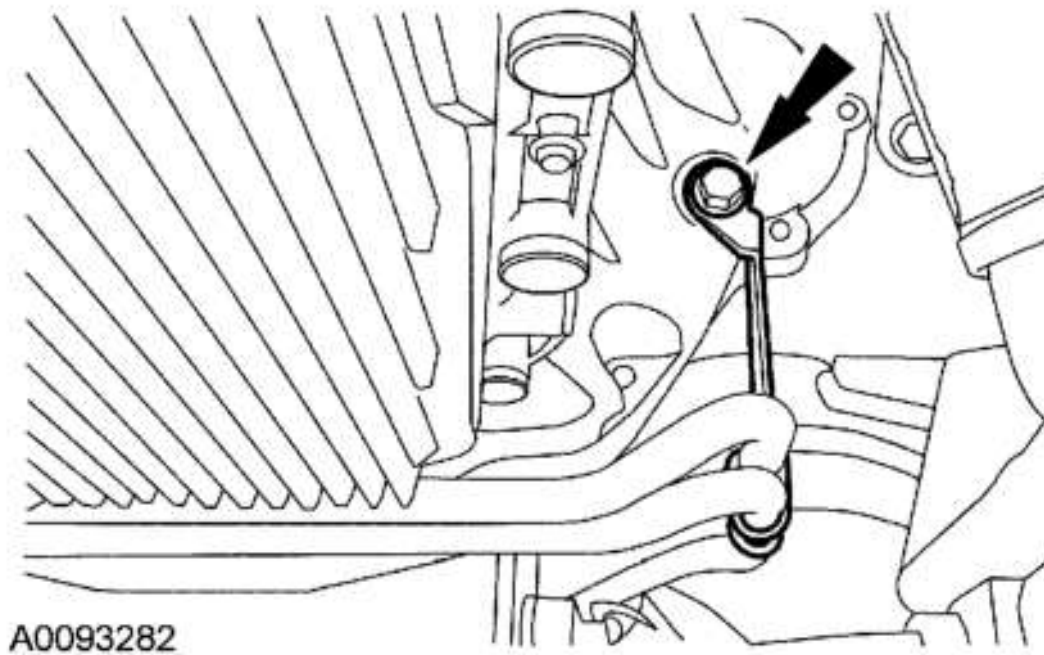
Remove Transmission Bolt Retaining Transmission Fluid Cooler Tube
